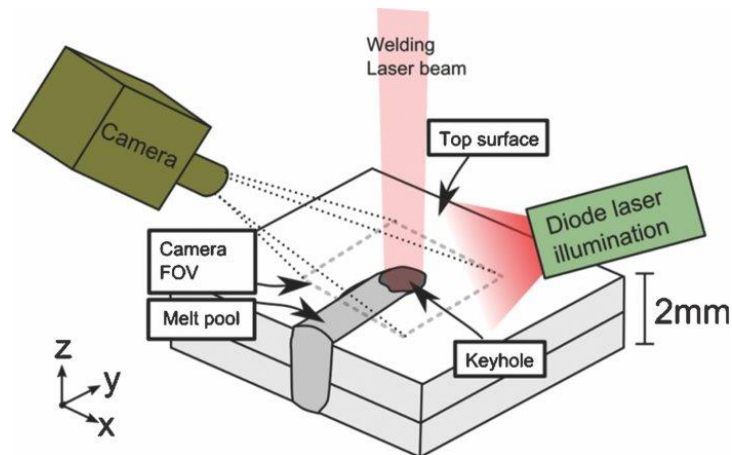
Schematic for HSI of laser welding (top view) [131].
